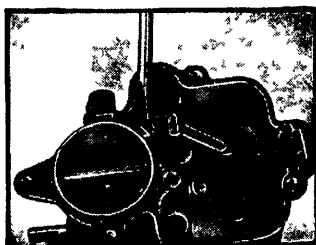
Remove pump check needle plug and needle. Disregard this operation in 1936 and prior models
